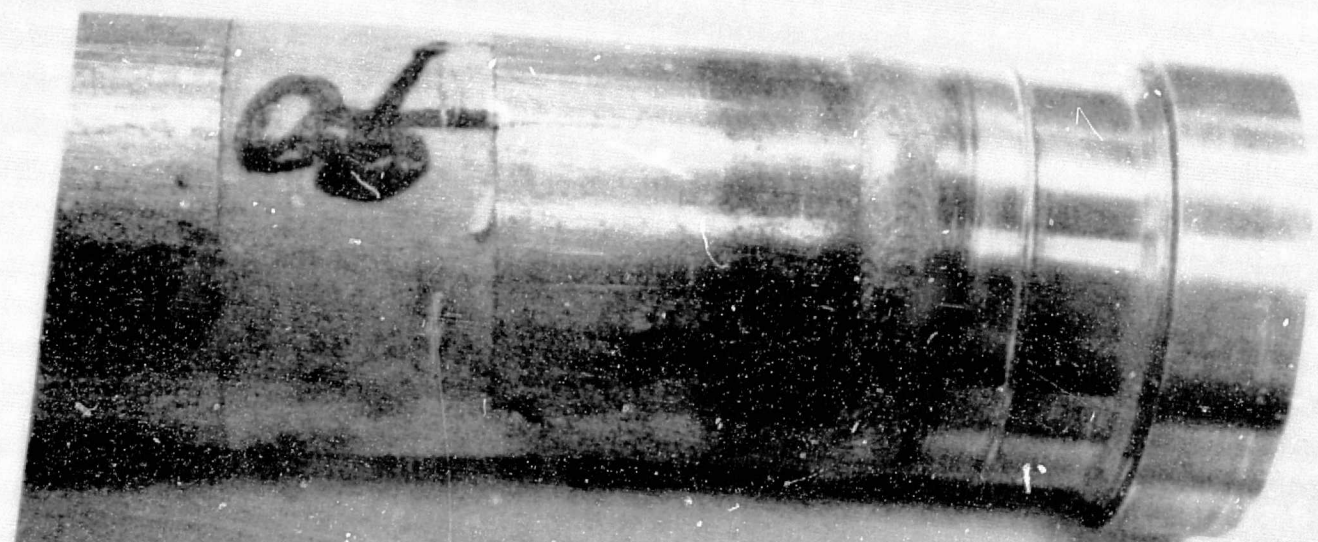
Close-Up View of the Weld in 1 1/2 Inch Size Tubing
